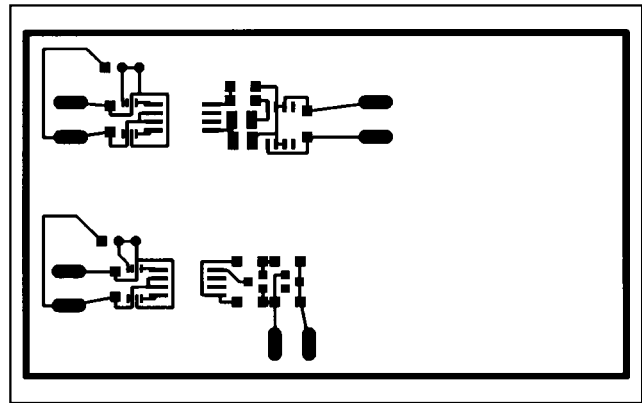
MAX845 EV Kit PC Board Layout—Component Side
